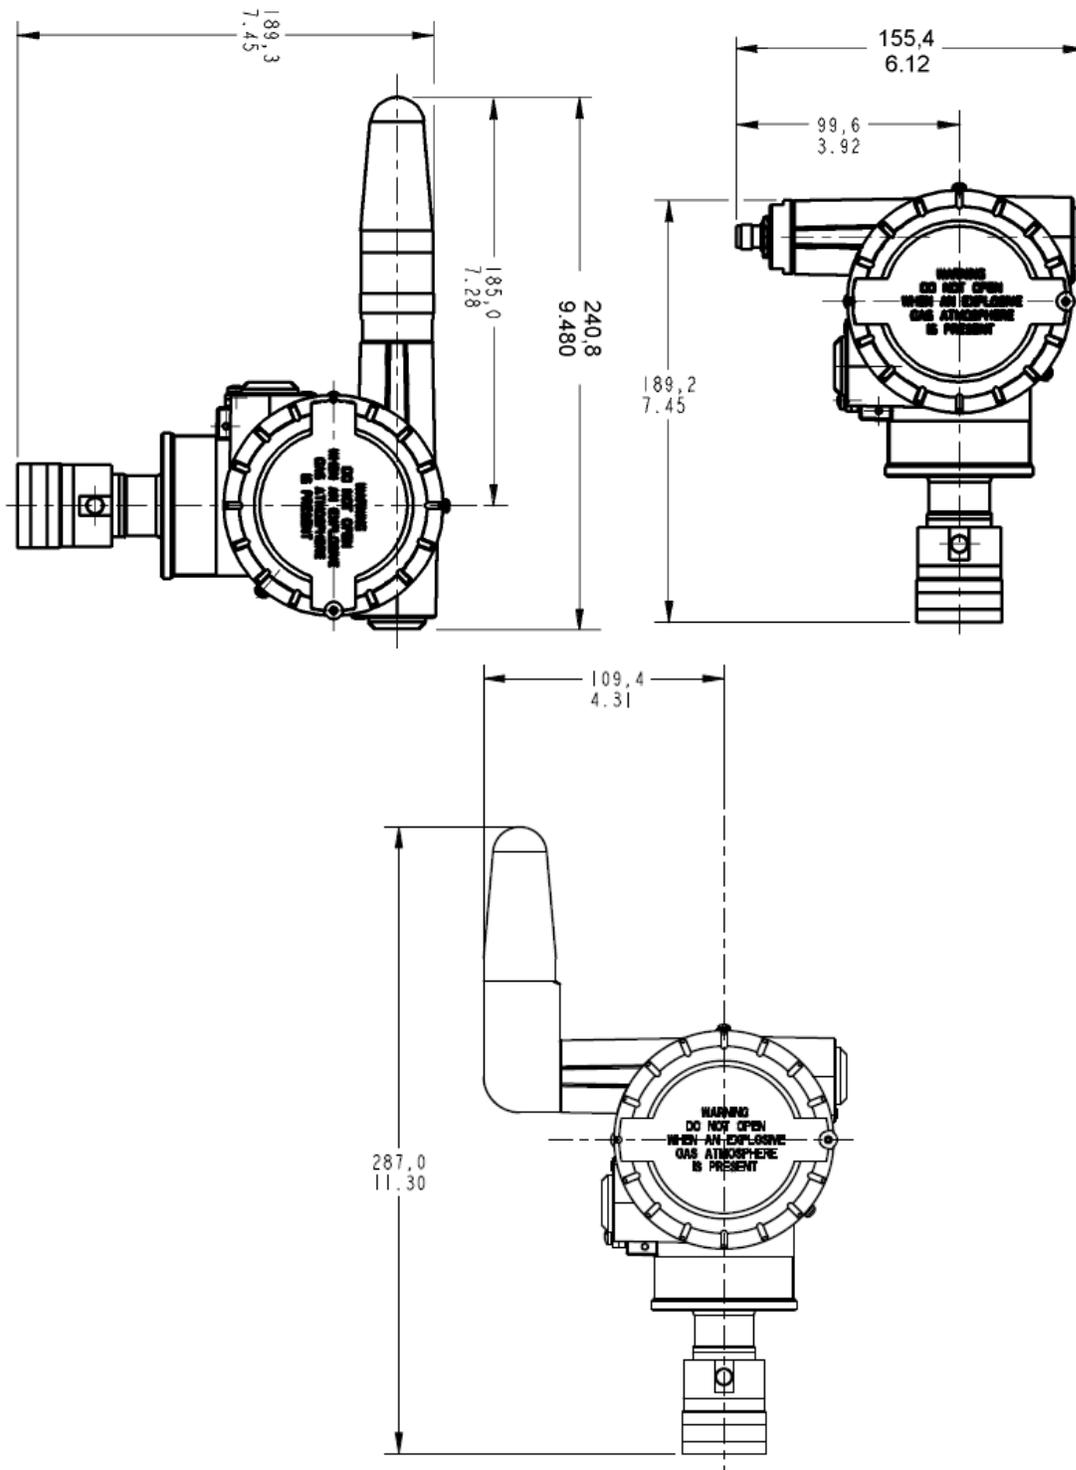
Typical mounting dimensions for in-line models STGW94L, STGW97L, STGW98L, and STGW99L (rear view)
